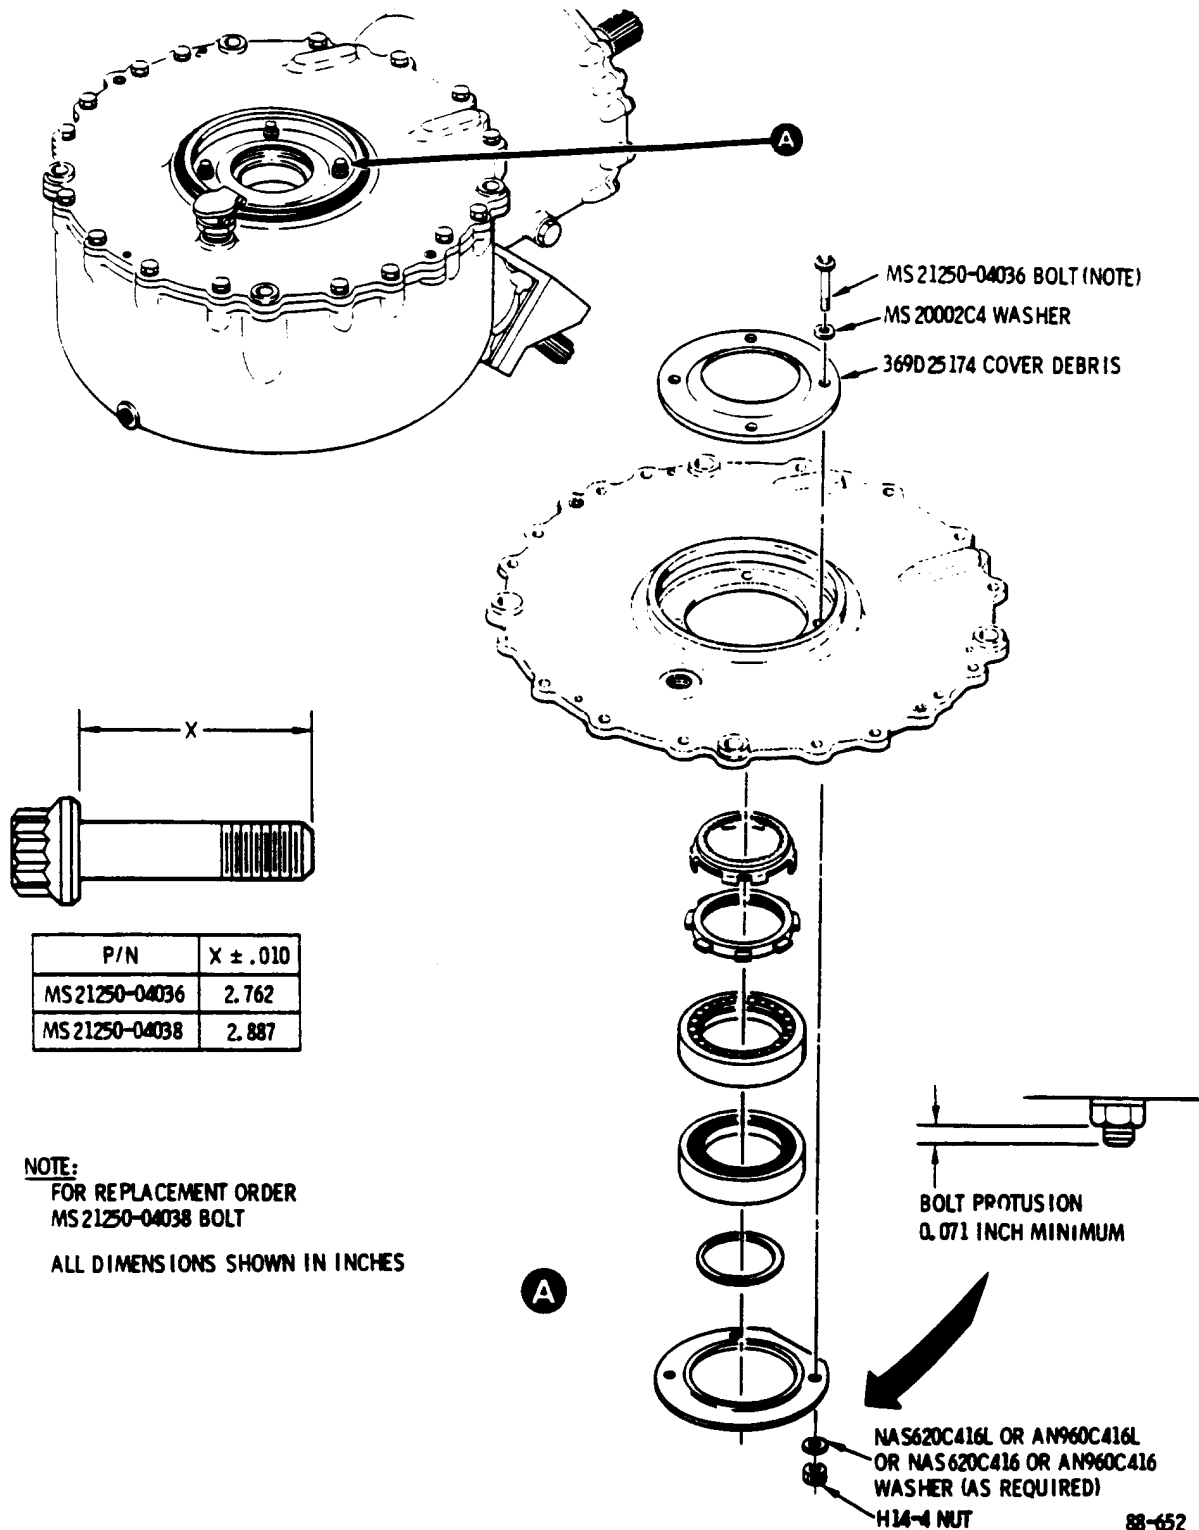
Inspection/Replacement of Main Transmission Output Driveshaft Bearing Assembly Bolts
